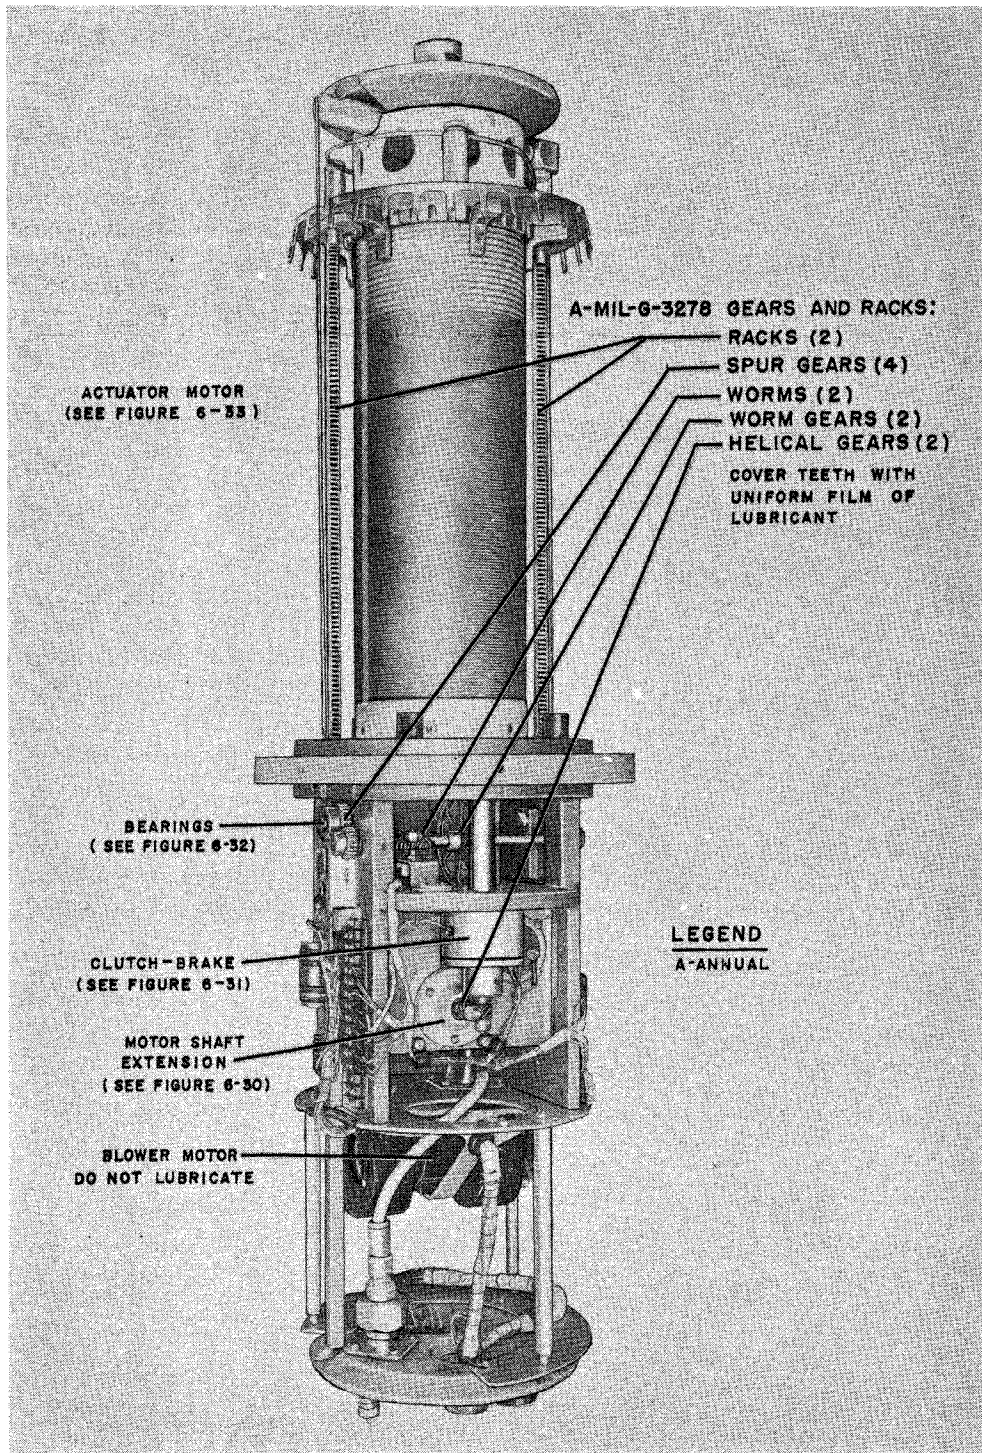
R-f Tuner, Gears and Racks, Lubrication
